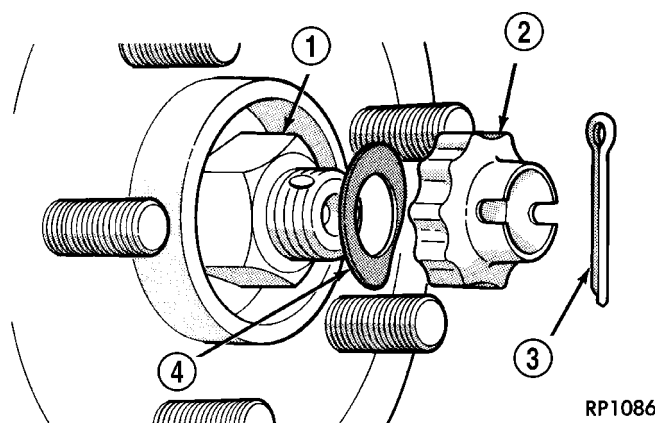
Cotter Pin, Nut Lock, And Spring Washer
